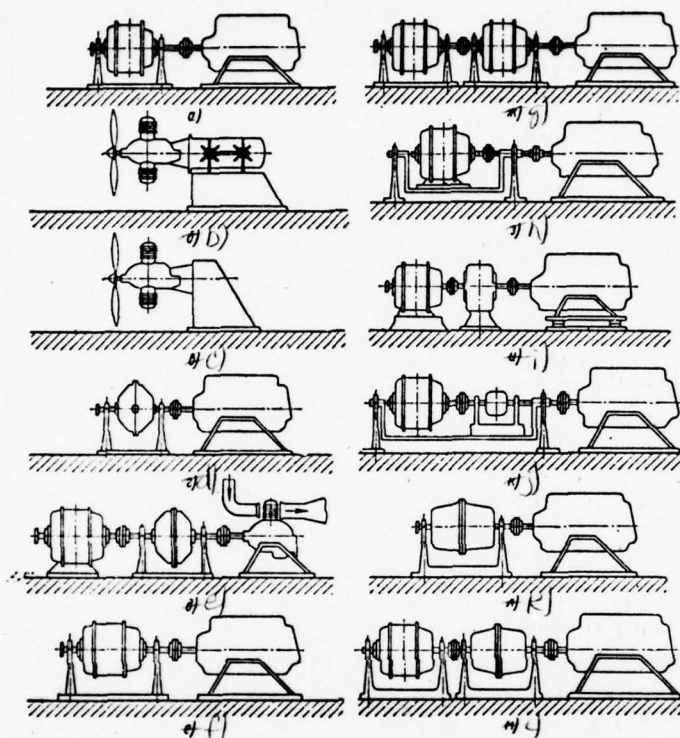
Schematics of the testing units: a) unit for the cold rolling of engines; b) bob stand with air brake; c) rigid stand with air brake; d) hydraulic-brake testing unit; e) hydraulic-brake testing unit with forced blowout and starting/launching electric motor; f) electric brake unit with the bob machine of direct current; g) electric brake unit with two bob machines of direct current; h) electric brake unit with the machine of direct current, establish/installed on bob platform; i) electric brake unit with hydraulic coupling and electric motor of alternating current (tested
